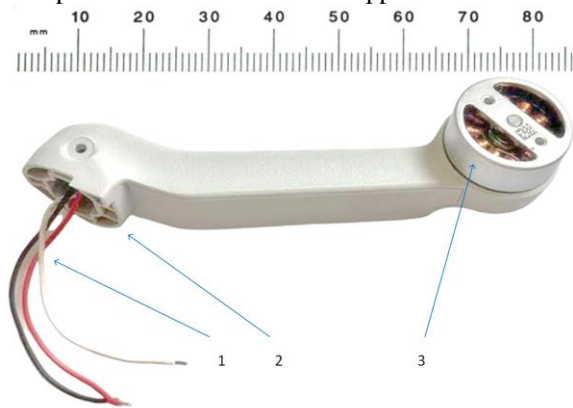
DJI Mini 2 quadcopter BLDC thrust motor mounting arm; where 1 are three coil power cables, 2 is thrust motor foldable mounting arm, 3 is BLDC thrust motor rotor.
